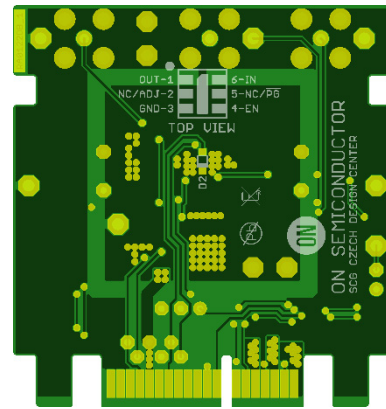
WDFN-6 2x2 Demo Board (2 layer, rev. 1) – PCB Bottom Layer
